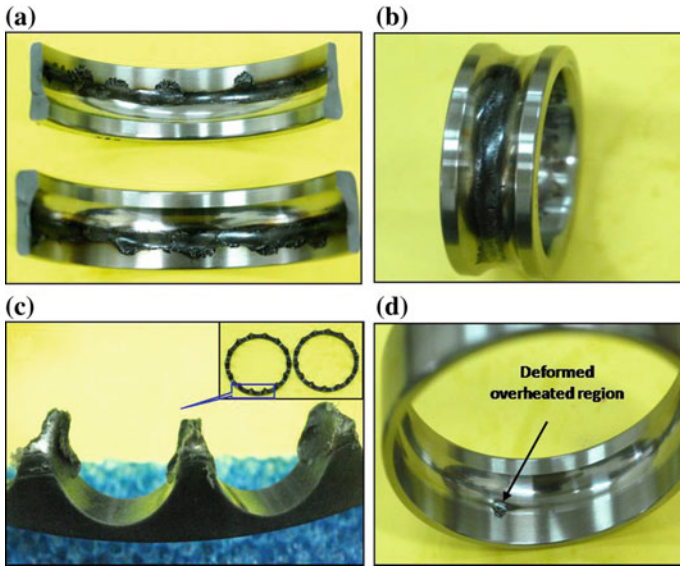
a Photograph showing the deformed region in the inner circumferential region of outer race of failed support bearing; b overheated and deformed region on the outer circumference of inner race of failed support bearing; c fractured surface of the failed cage (inset) of support bearing; d deformed overheated region in the other support bearing
